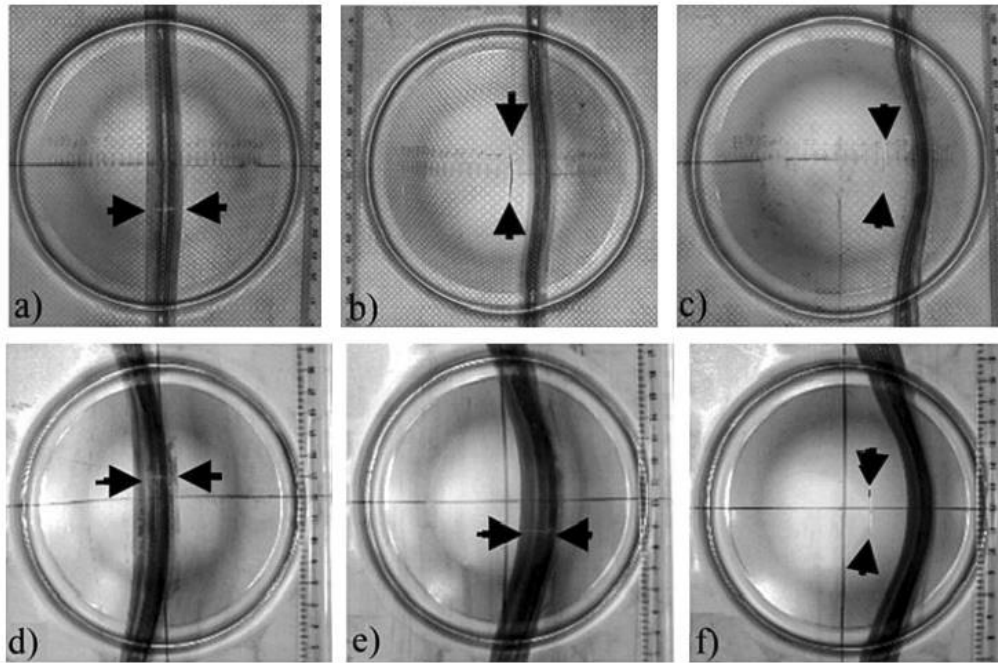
Failure locations in formed (a–c) linear and (d–f) curvilinear HSLA welded blanks with weld line positions of 0 mm, 15 mm, and 30 mm from center. (Li et al., 2013)
